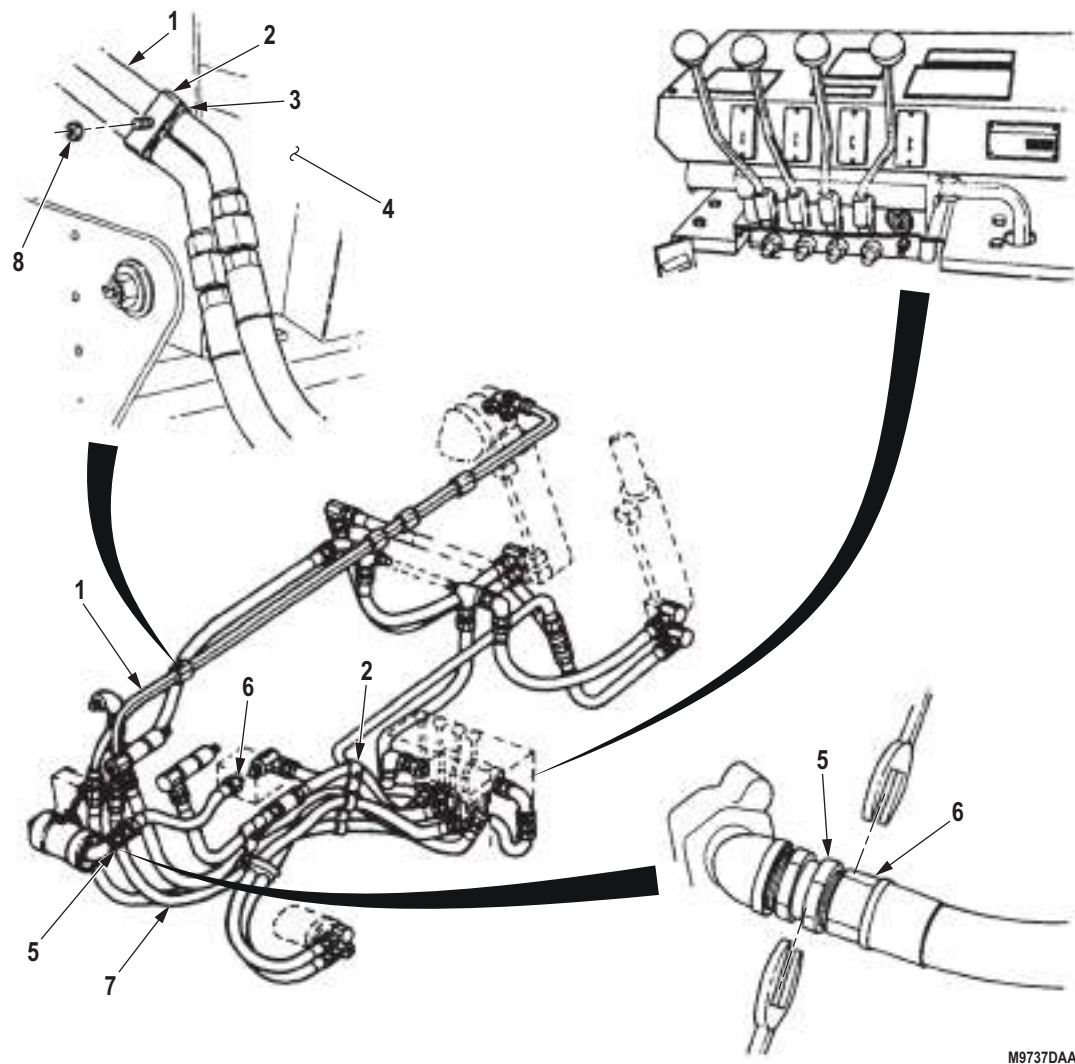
Wrecker Crane Hydraulic Hose and Tube Removal.
